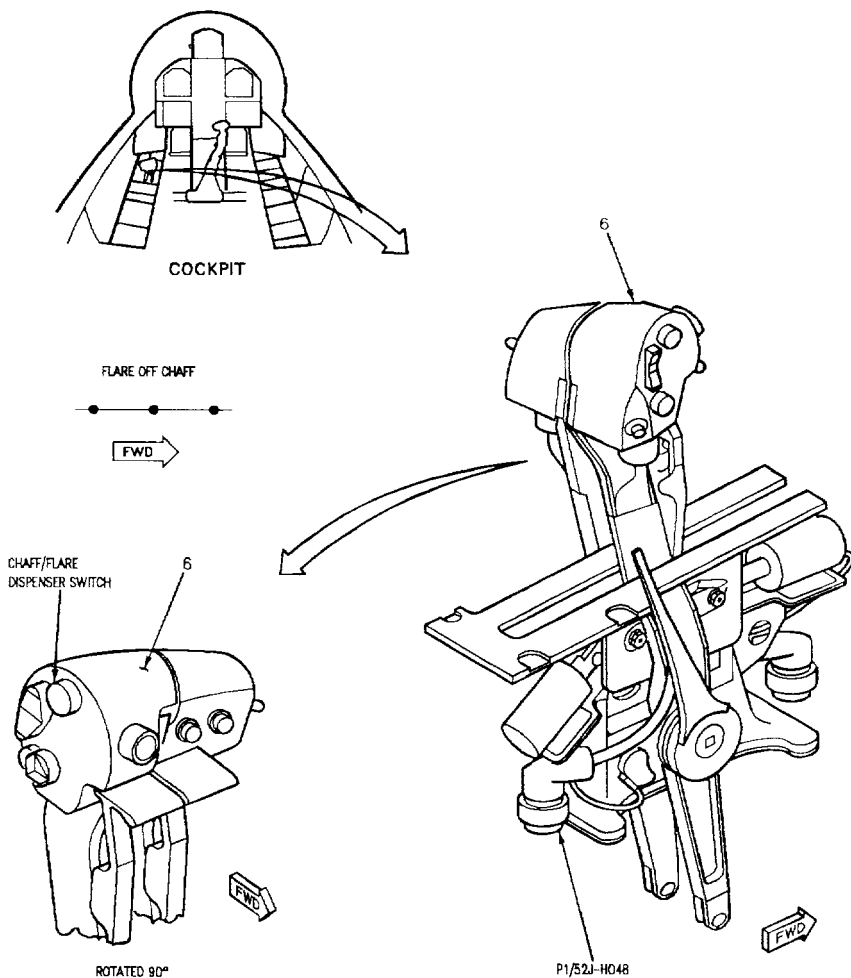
Countermeasures Dispensing System Locator (Sheet 3)
